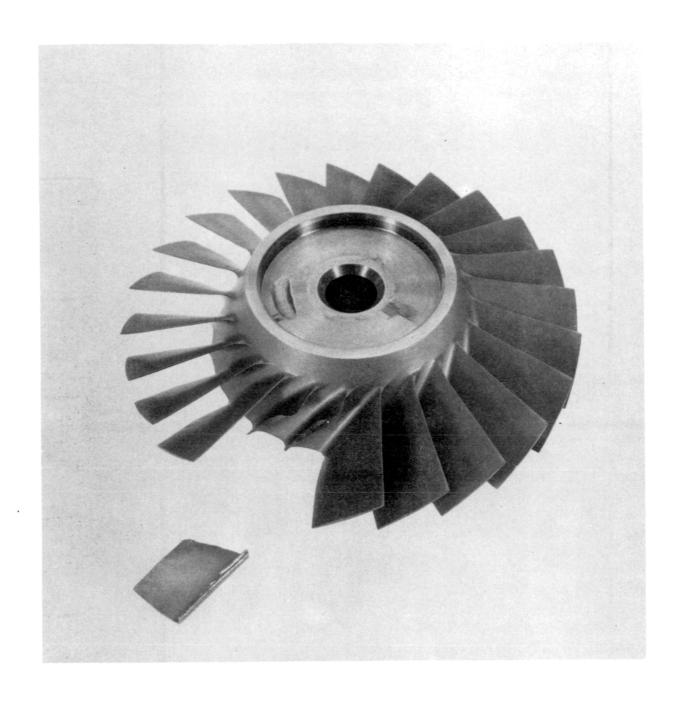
NASA 6:1 Compressor Test Rig SKP25657-1 Inducer Failure.
